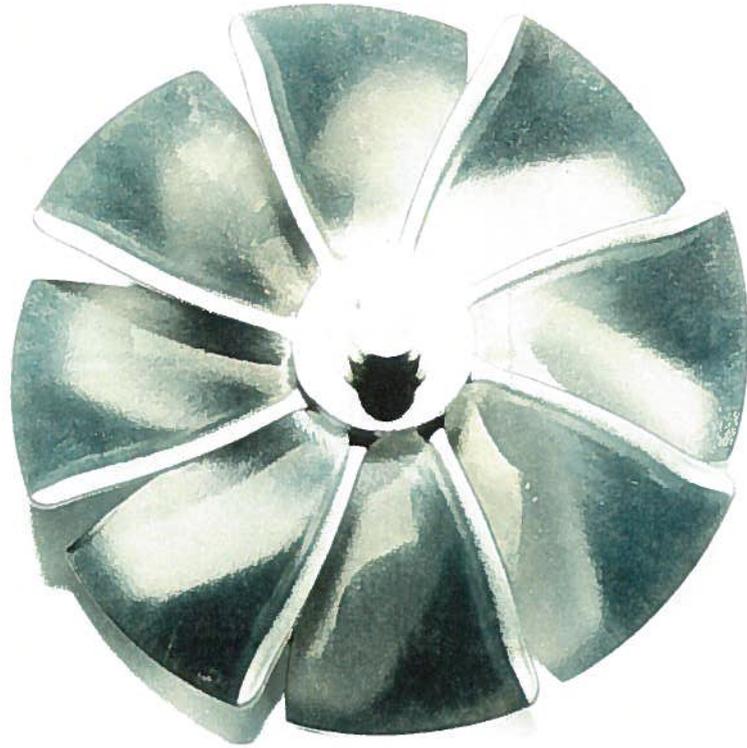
MANUFACTURER B. 100 mm DIAMETER METER, ROTOR BLADE WEAR
